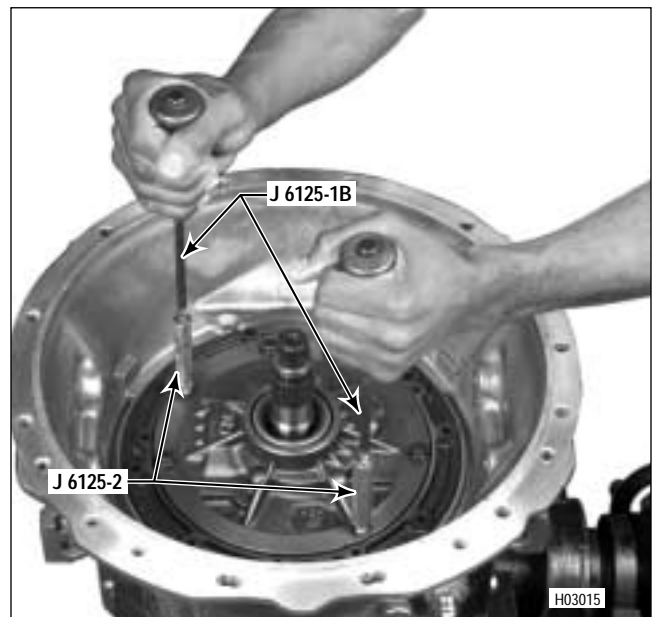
Removing Pump Assembly (Models with Retarder)
